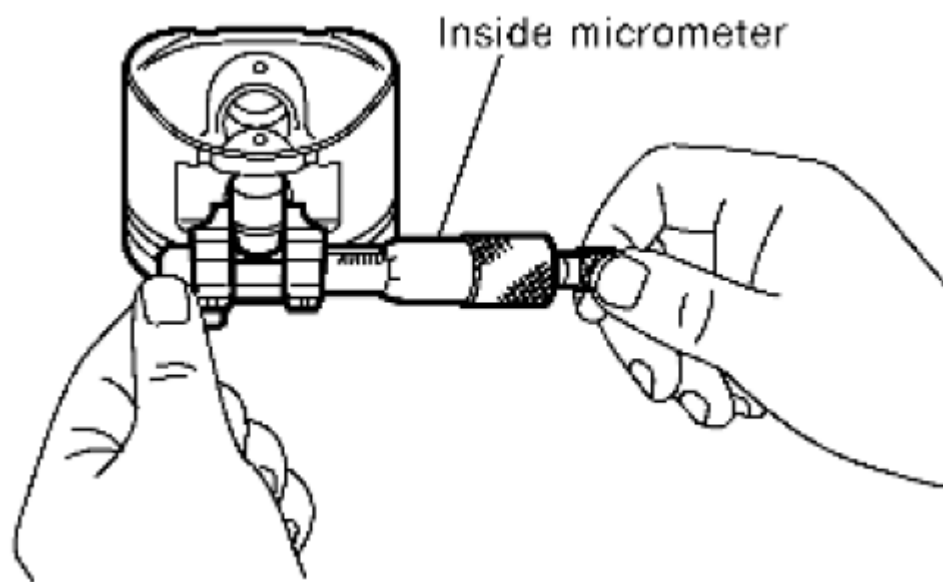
Measuring Inner Diameter Of Piston Pin Hole With Inside Micrometer
